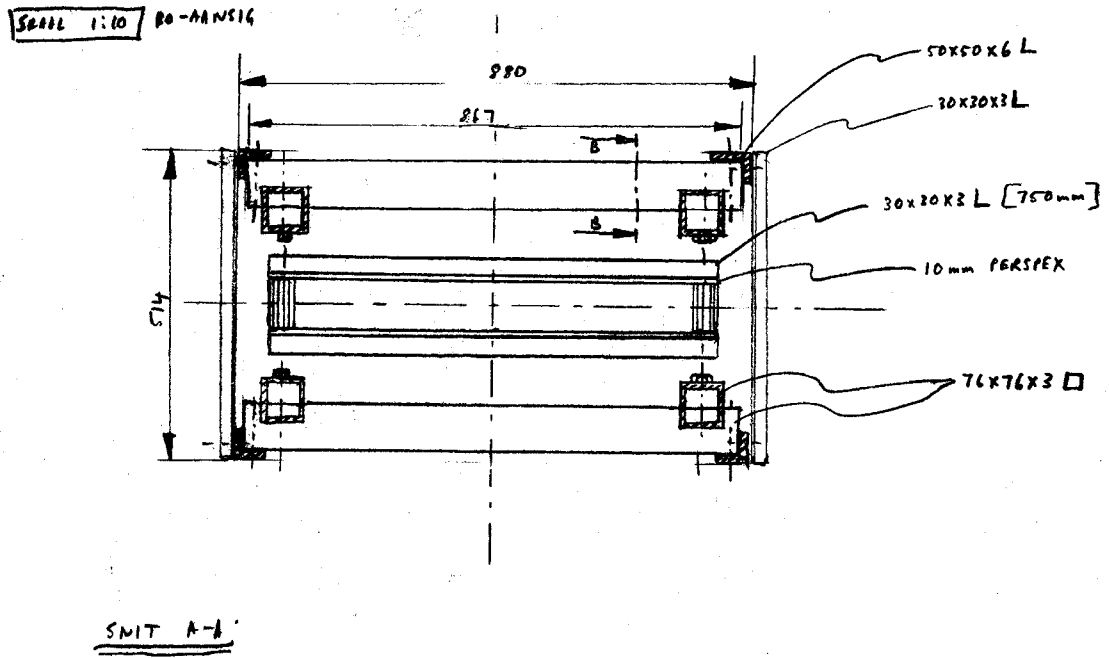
Water model frame, top view and detail: Detail hand drawing
